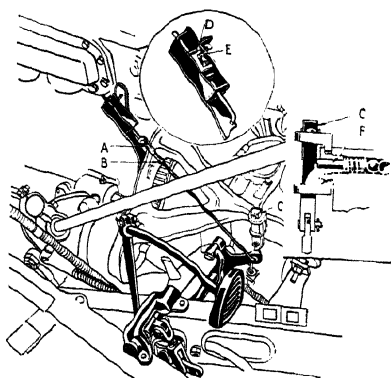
ADJUSTMENT OF CLUTCH CIRCUIT BREAKER—CIRCUIT OPEN POSITION
